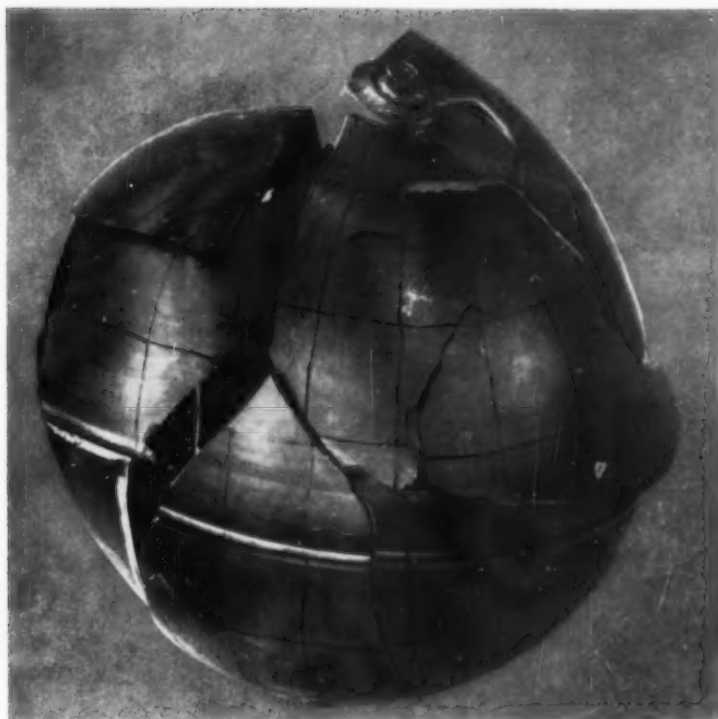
Welded Spherical Fuel Container Tested to Failure at -320°F . Since failure was in parent metal, weld design was successful
